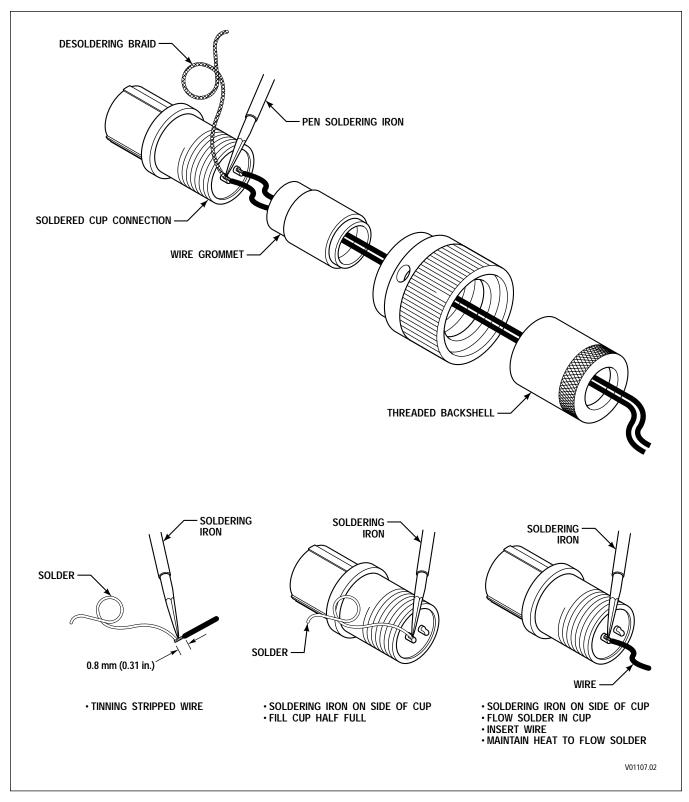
ITT Cannon Connectors — Soldered (2-Way HD Retarder)
